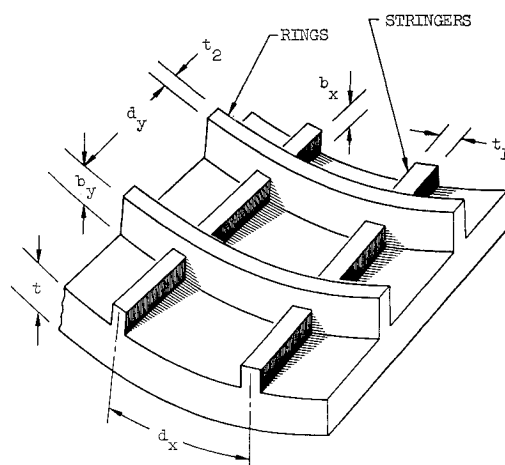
View of hull section with internal rings and stringers of rectangular cross section, showing nomenclature for dimensions.
